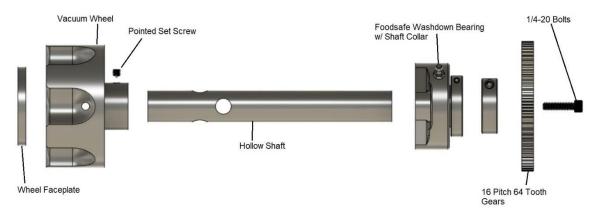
Exploded view of the shaft, wheel, and gear subassembly.
